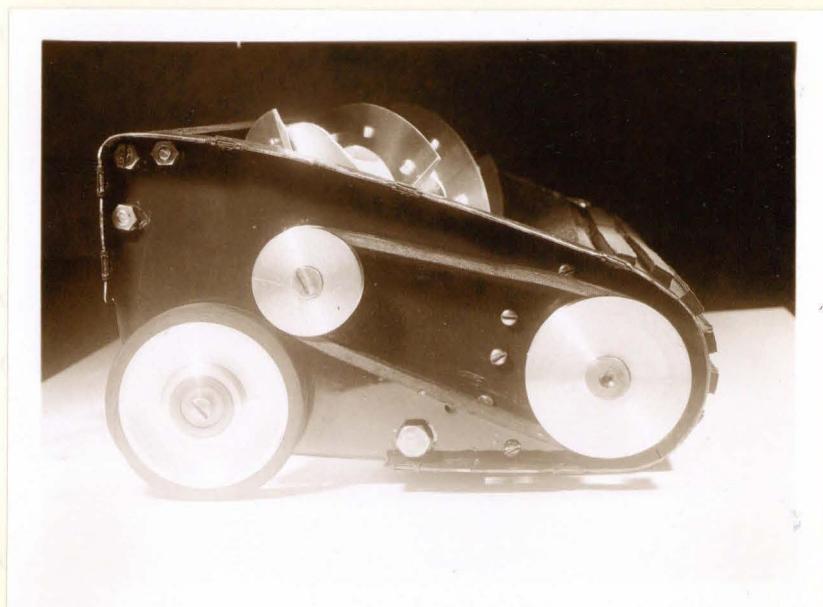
OUTSIDE PANEL REMOVED SHOWING "V" BELT DRIVE
